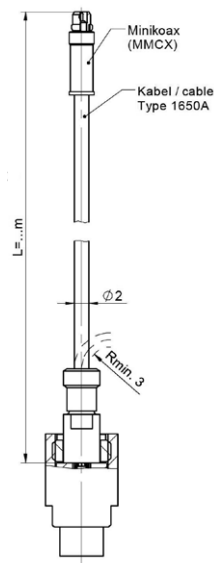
Sensor Type 6172B with coaxial cable and minicoax connector
